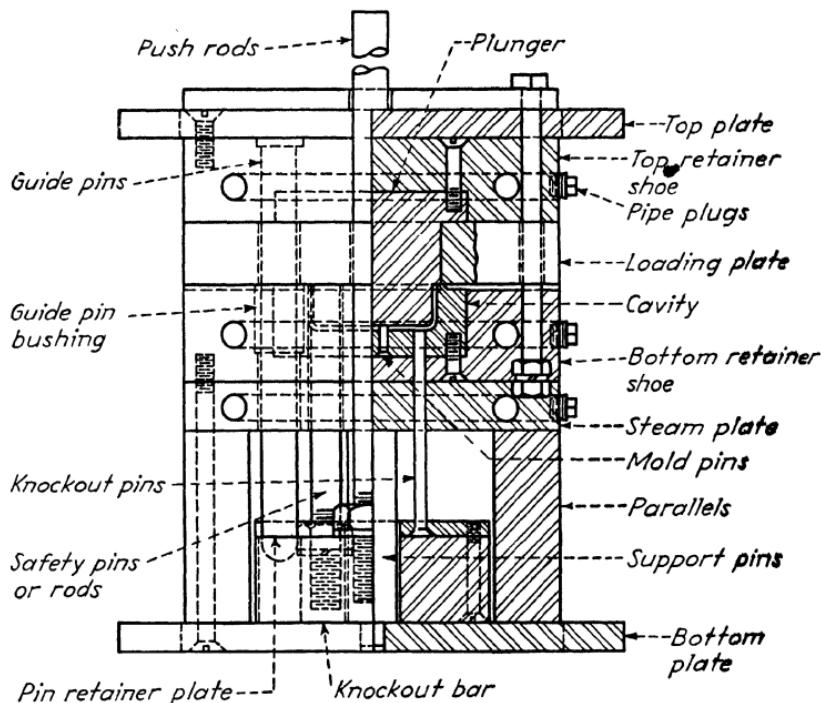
In the loading shoe-type mold the loading plate rests on bottom steam retainer shoe and the cavity. Push rods reset the knockout bar.
